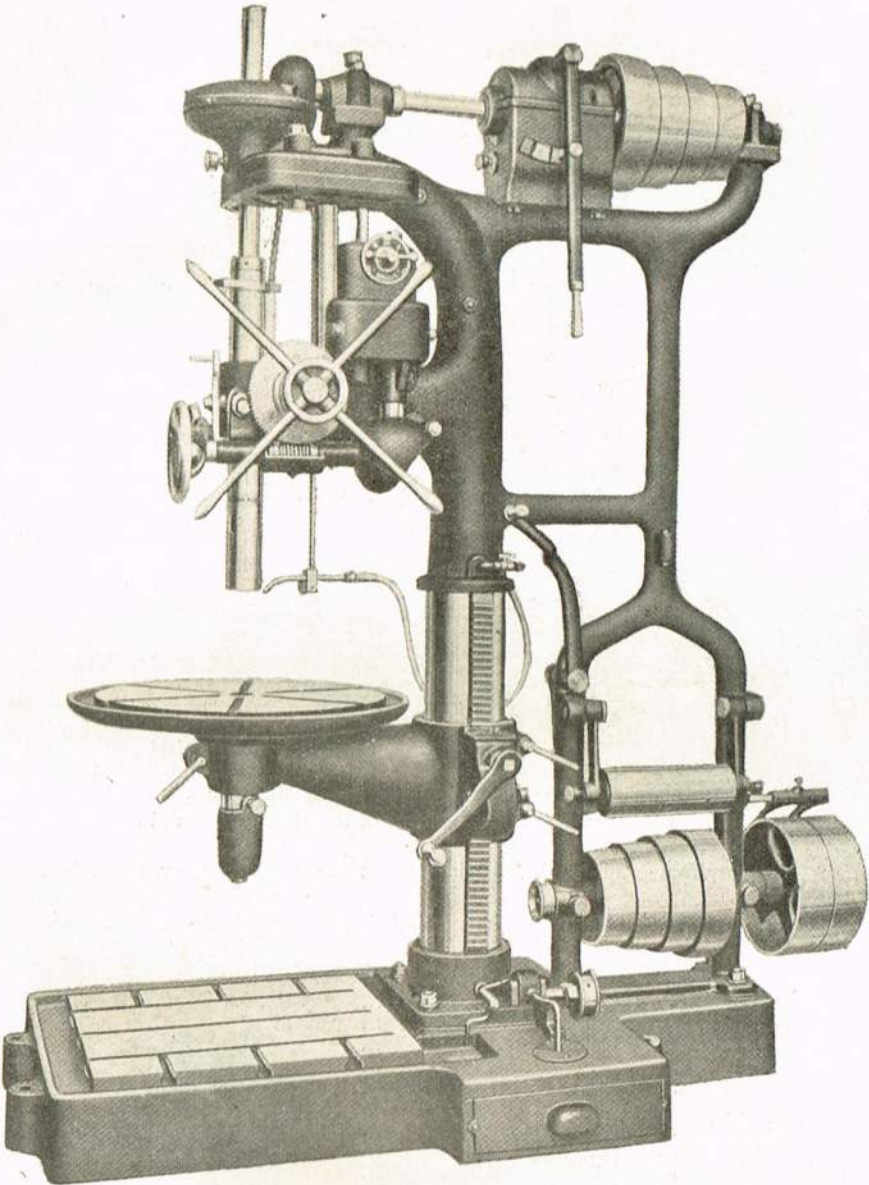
The "Brighton" 32" High-Speed Precision Drilling Machine.
